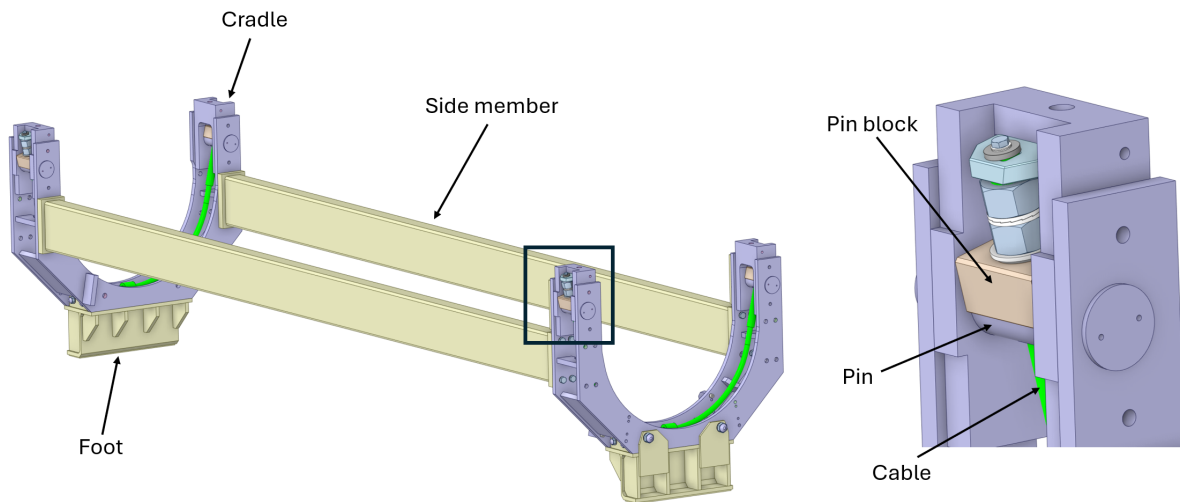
Left: The structure of the support frame with its feet, cradles and side members. Right: detail view on the cable connection.
